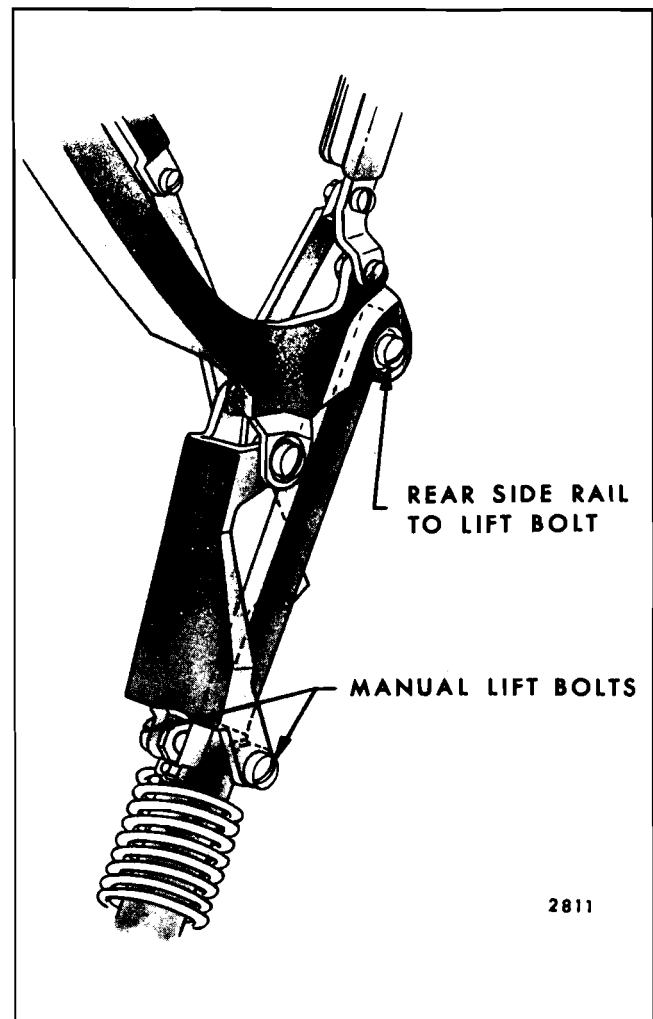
Folding Top Manual Lift Attachment - "A" Styles
